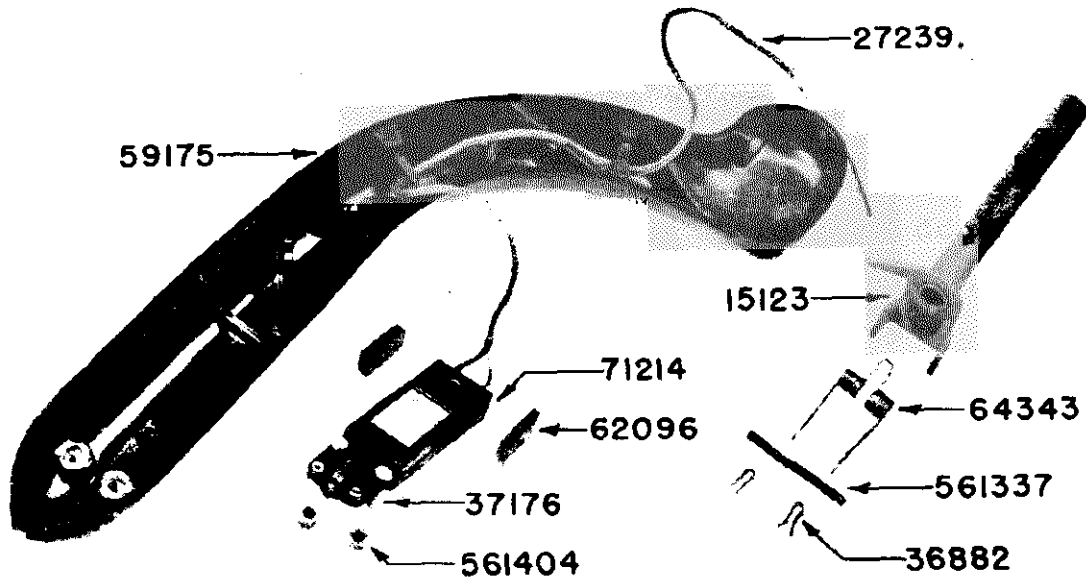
TONE ARM ASSEMBLY No. 13434
